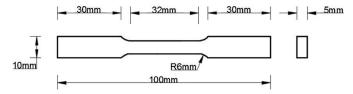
Illustrates test specimen of ASTM E8M04 Standard Tensile
